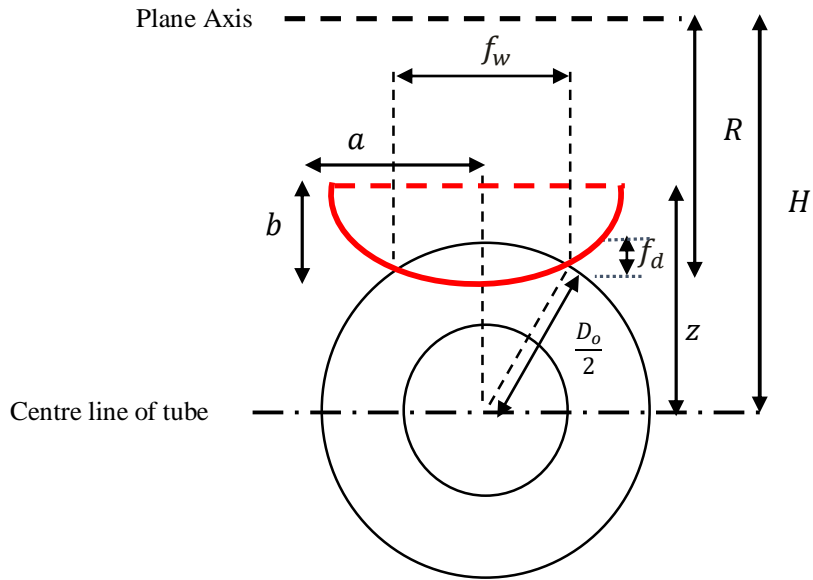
Front view of the u-shaped flaw showing the cutting plane in red, intersected with the tube cross-section.
